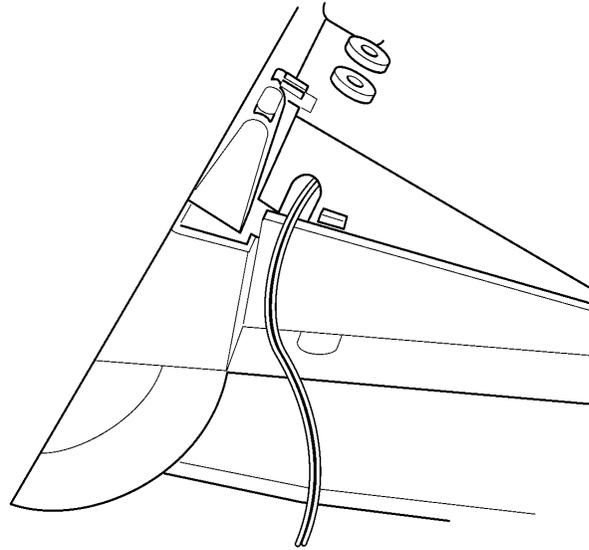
Attaching the Unit to the Multiline Terminal
